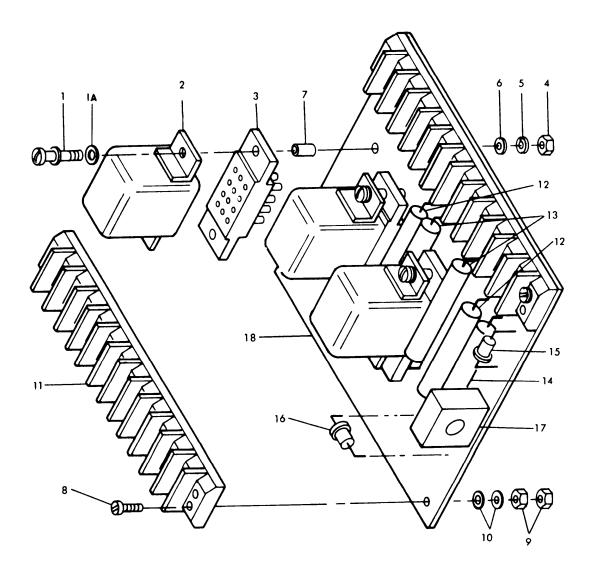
Special Relay Box Assembly (Sheet 2 of 2)
